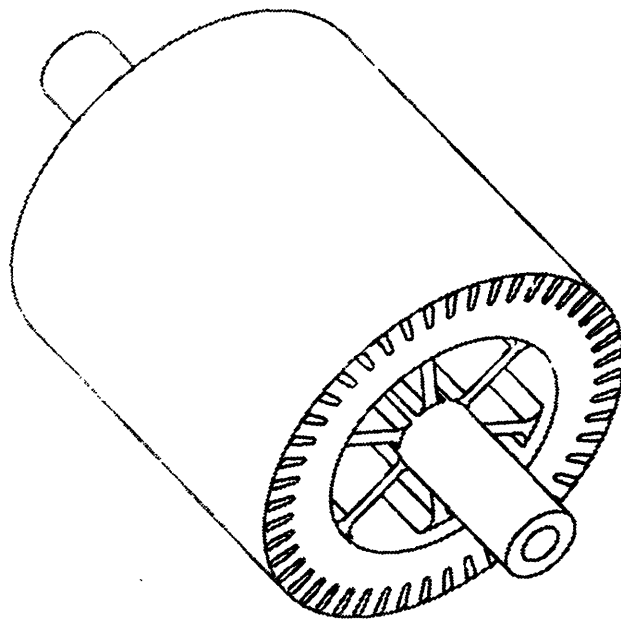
Traction motor magnetic core with integrally machined shaft
